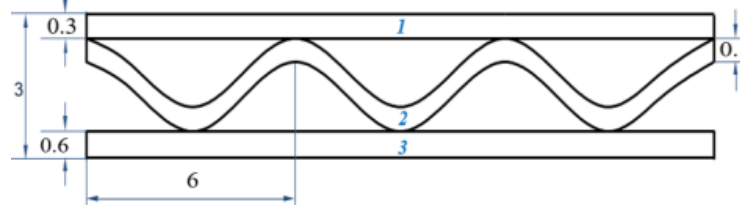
Geometric dimensions of the A6063 aluminum sandwich panel
